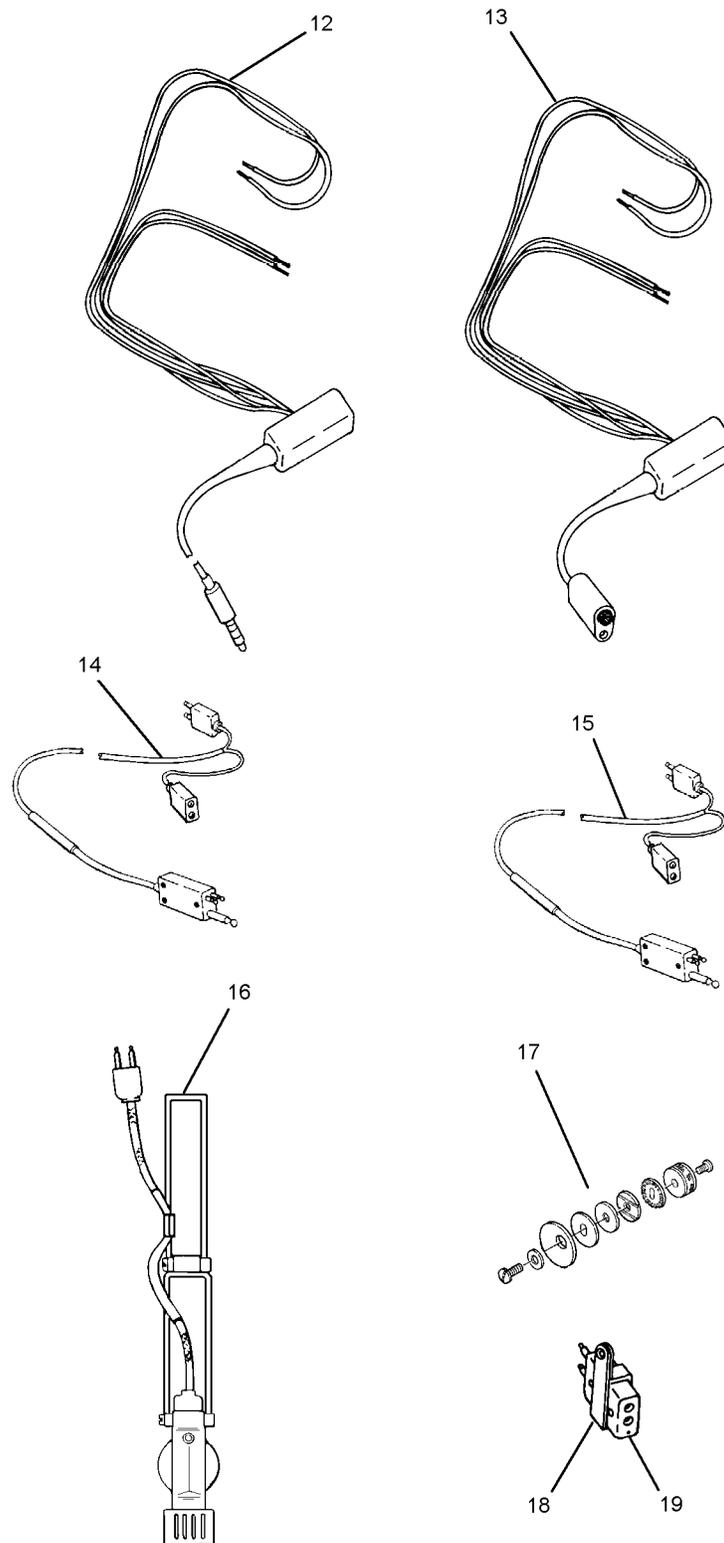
HGU-85(V)/P Helmet Assembly (Sheet 2 of 2)
